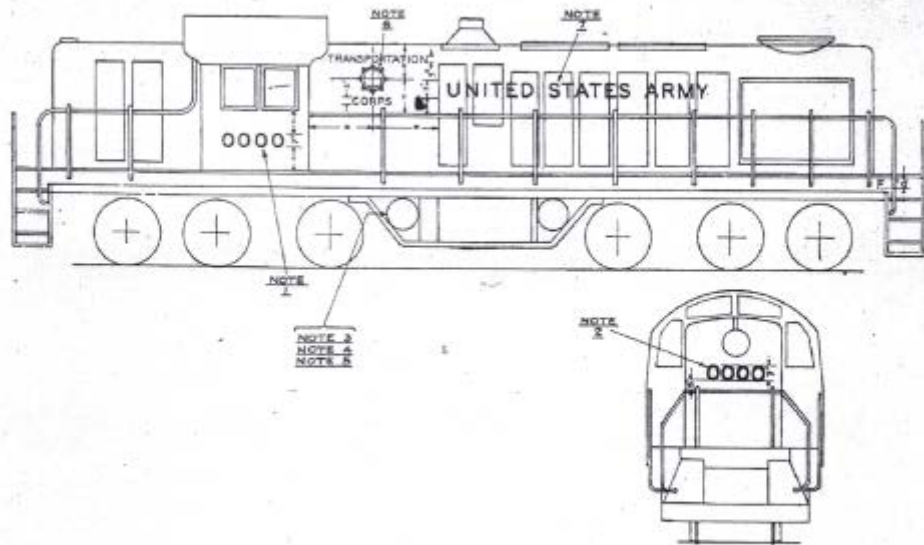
Standard markings for Diesel-electric locomotive with cab located to rear of engine.
